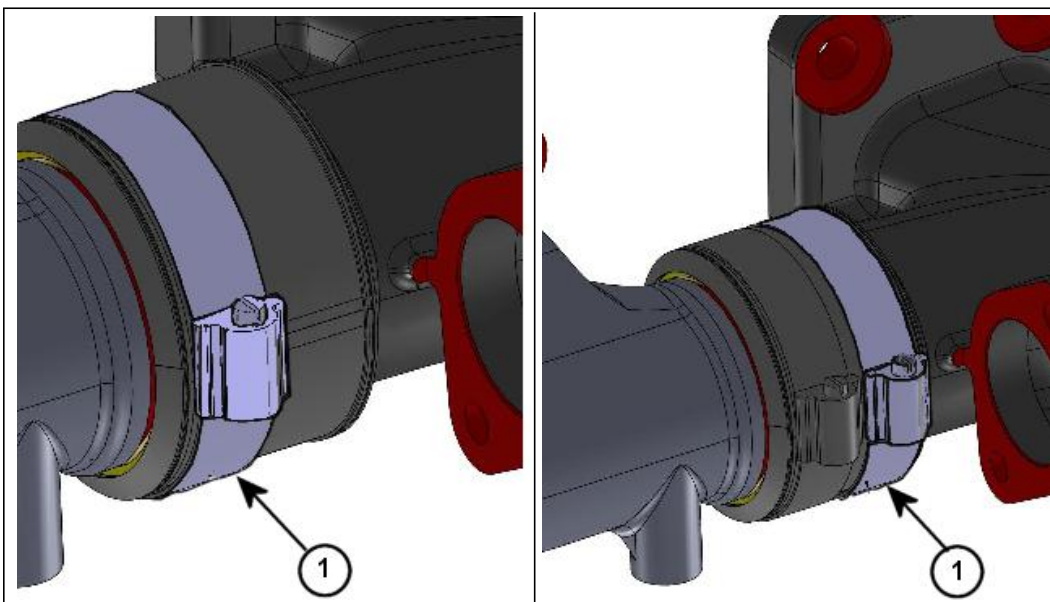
Install Worm Drive Clamp at Rope Packing | Figure 6 - Install Second Worm Drive Clamp
